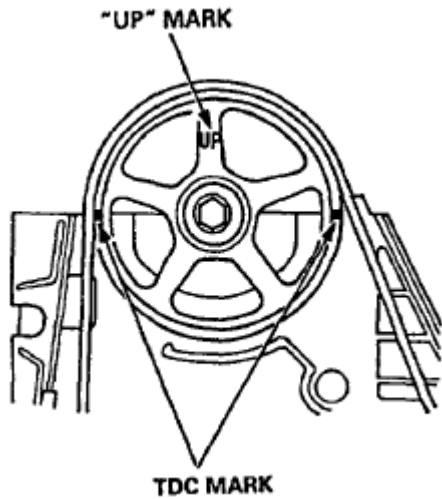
Identifying Camshaft Pulley And TDC Mark
